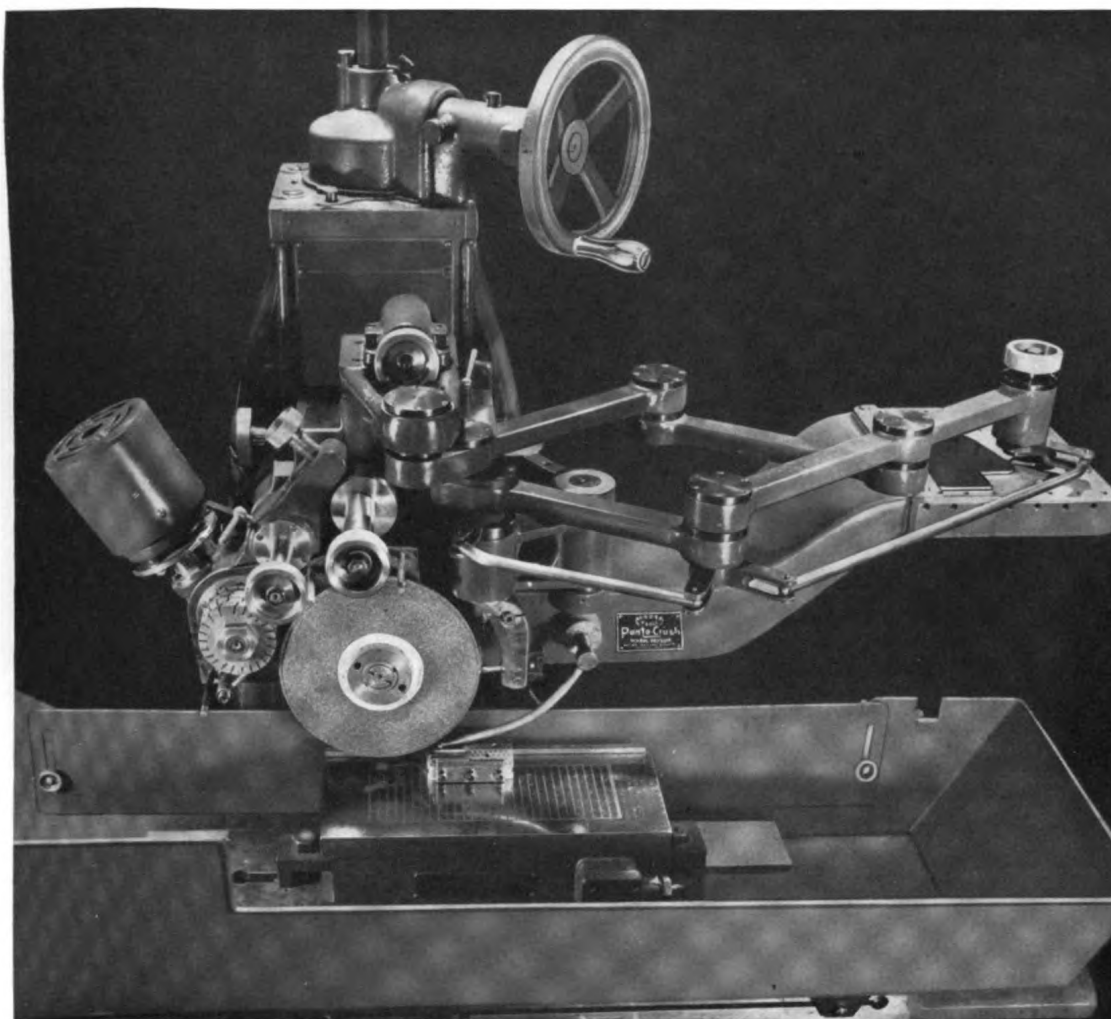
The Moore Panto-Crush Wheel Dresser combines diamond and crush dressing from a template.
